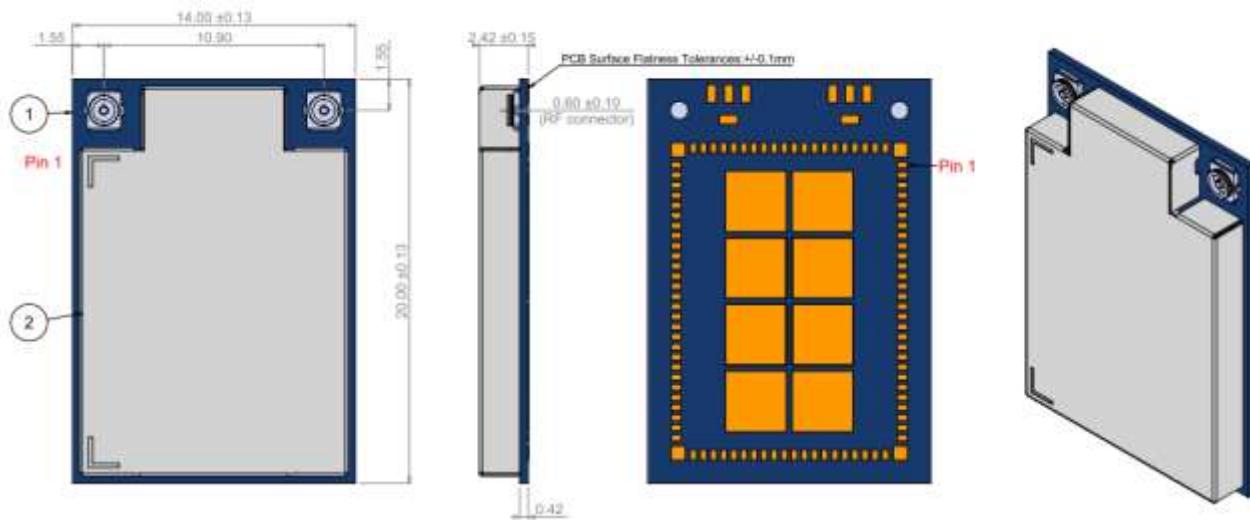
Detail PCB footprint for the Sona MT320 M.2 1420 is shown in below.
